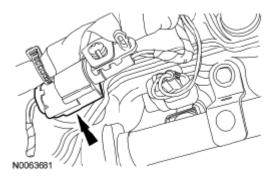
Locating Fuel Injector Electrical Connectors Courtesy of FORD MOTOR CO.
